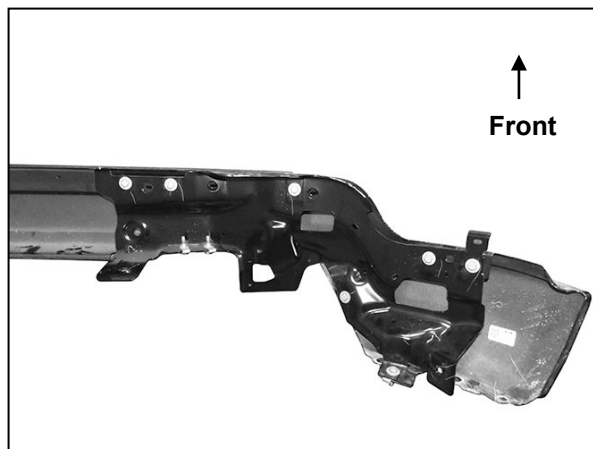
Remove the inner bumper bracket from the back of the bumper
